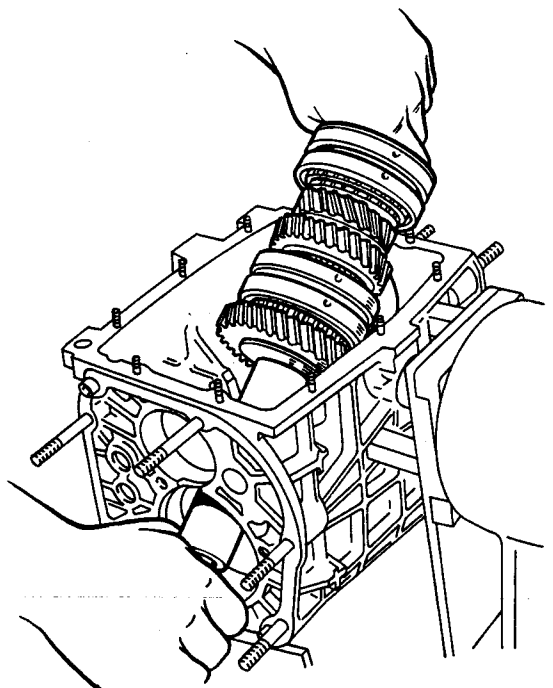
Removing Main Shaft from Gearbox Housing
